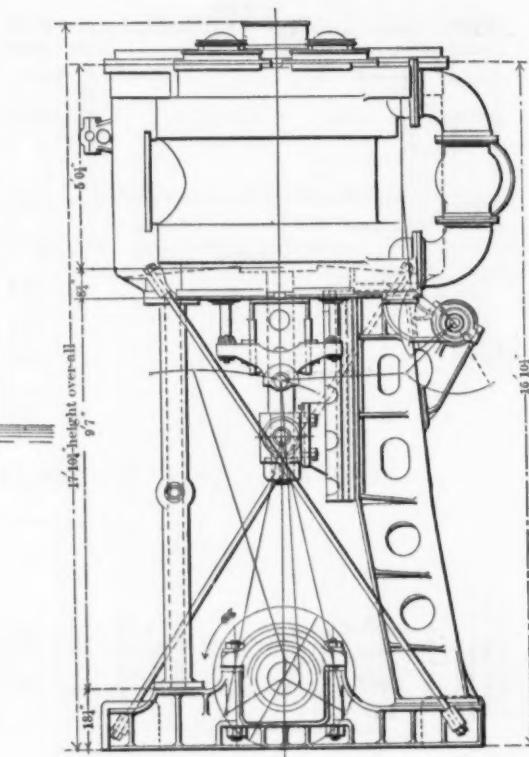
End Elevation of Starboard Engine, Looking Aft.
